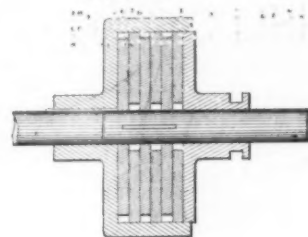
WESTON CLUTCH, INTERPOSED FRICTION PLATES.
